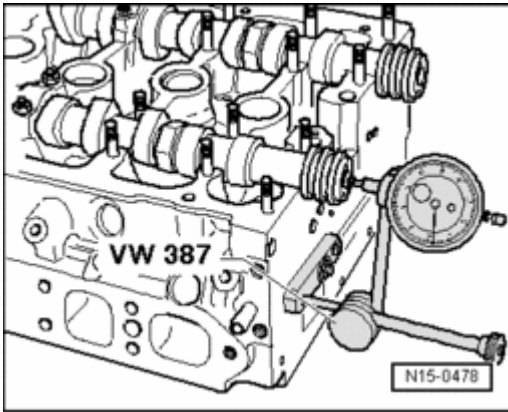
Securing Universal Dial Gauge Bracket VW 387 With Dial Gauge To Cylinder Head
